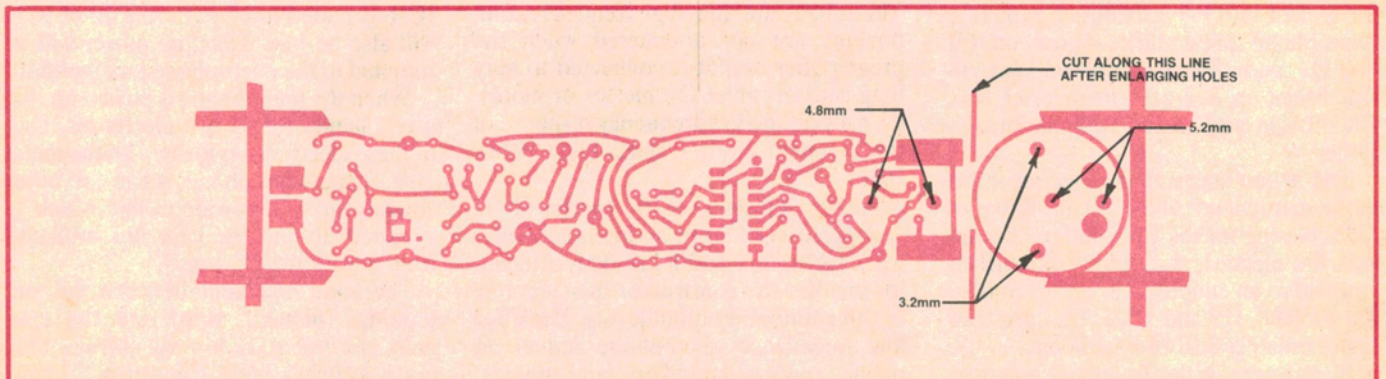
enlarge the holes in the PCB as shown, then separate the main section from the rear cover.
